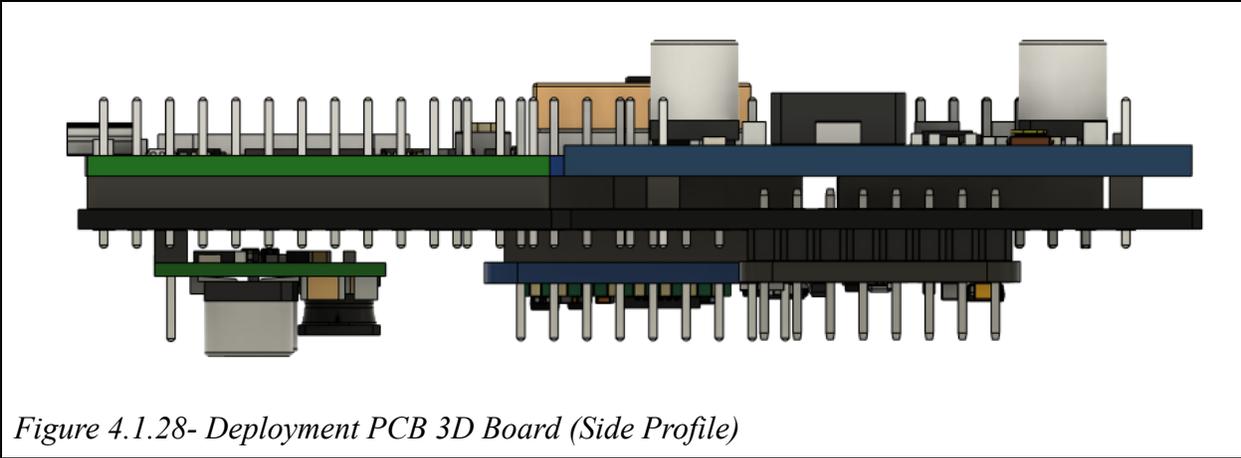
Deployment PCB 3D Board (Side Profile)
